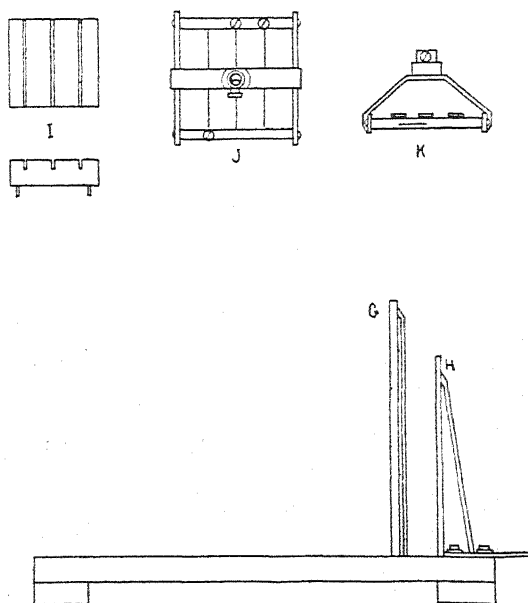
Shear test equipment and jig for cutting slices. I.—Shear test base; J-K—Shear test head; G—Knife guide; H—Adjustable plate.
